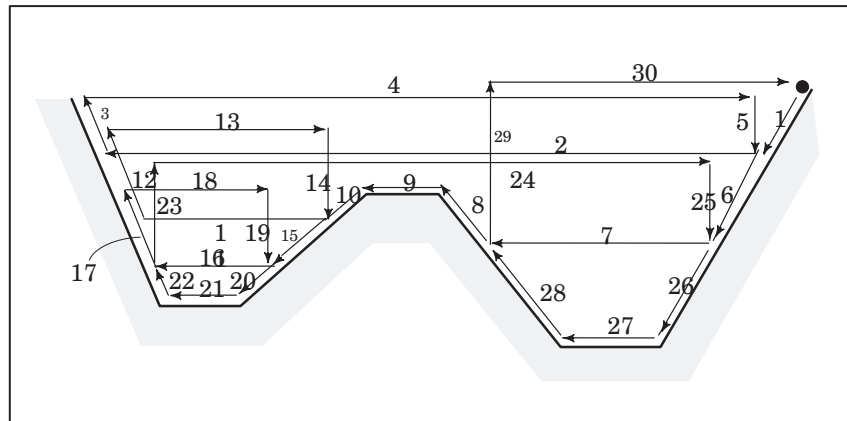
(e) Chamfering in Stock Removal in Turning (Type II)
